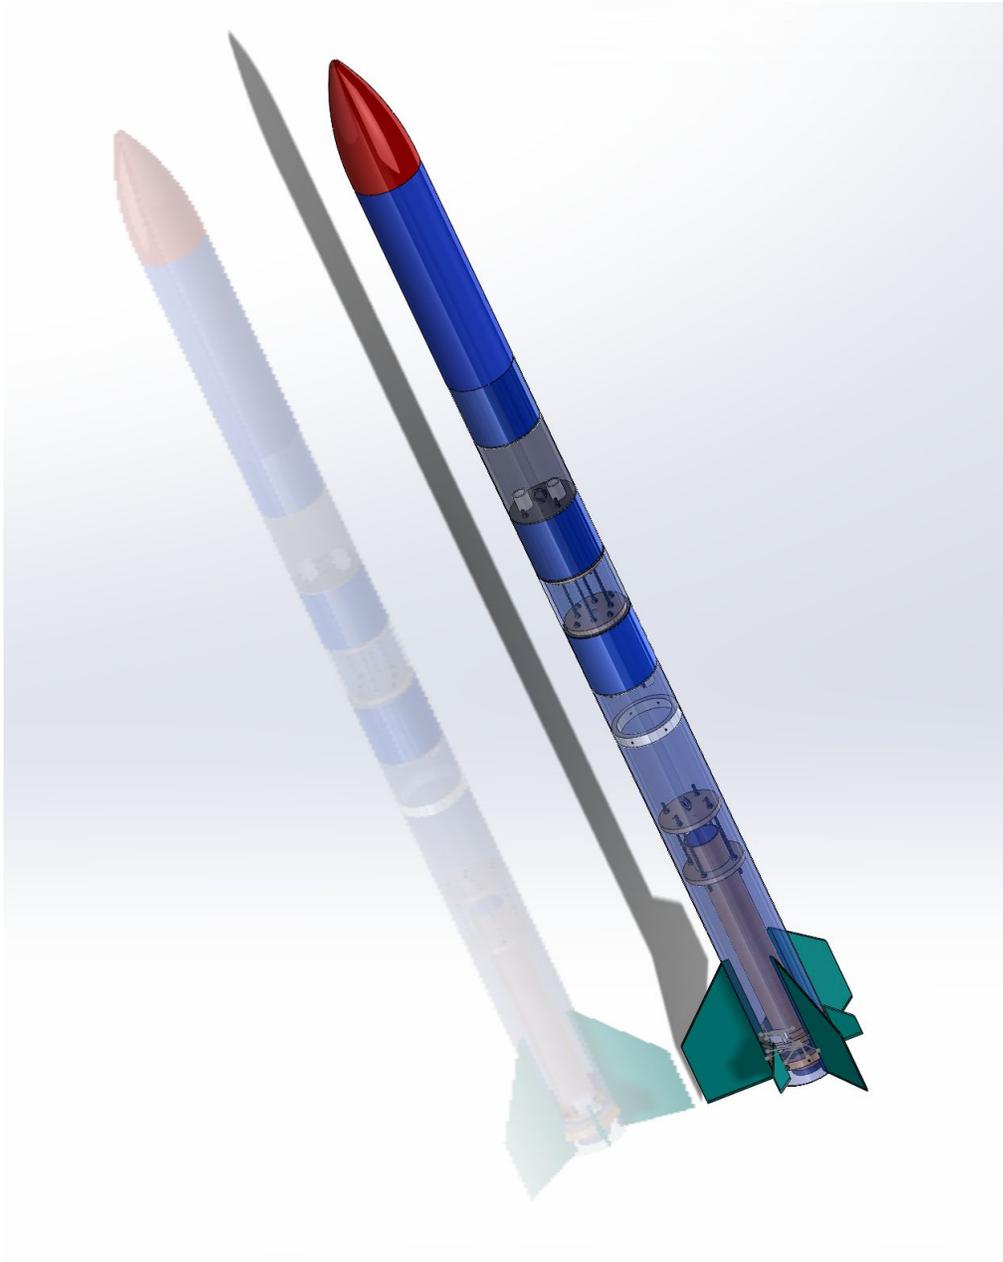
Full Assembly of Rocket in SolidWorks
